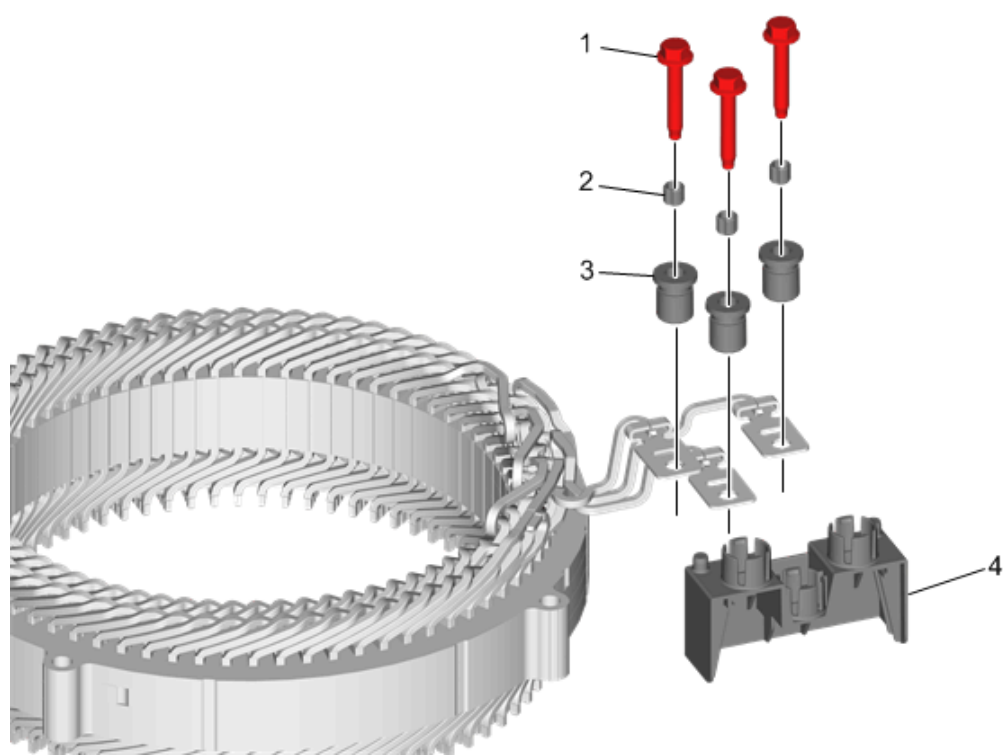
Drive Motor Power Inverter Module Cable Guide Assembly
